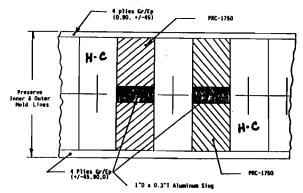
Cross Section of Composite Panel Using Tuned Dampers.
